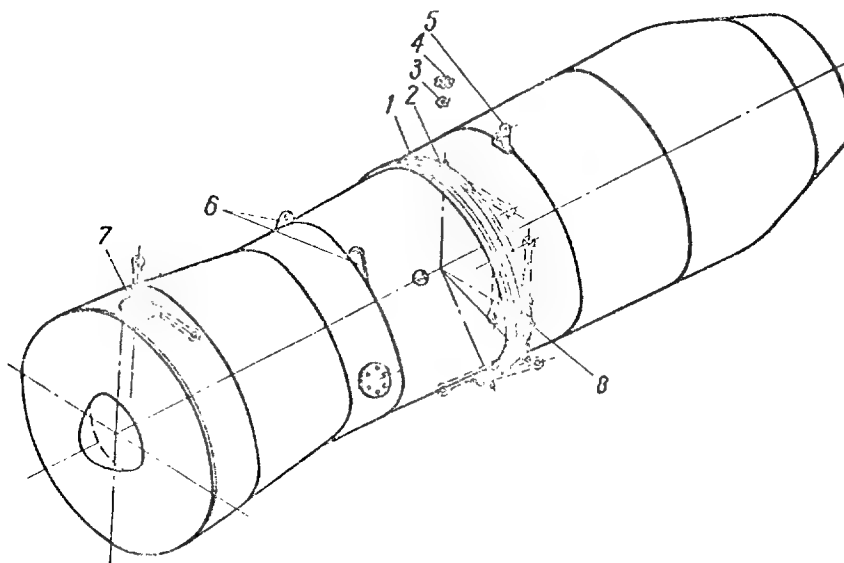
DIAGRAM SHOWING UNITS FOR ENGINE ATTACHMENT IN AIRCRAFT
